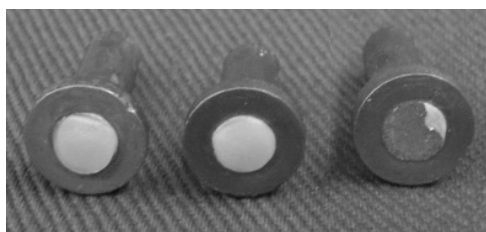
A view of debonded surface after test. FP specimen (left), PC specimen (middle), PCG specimen (right)
